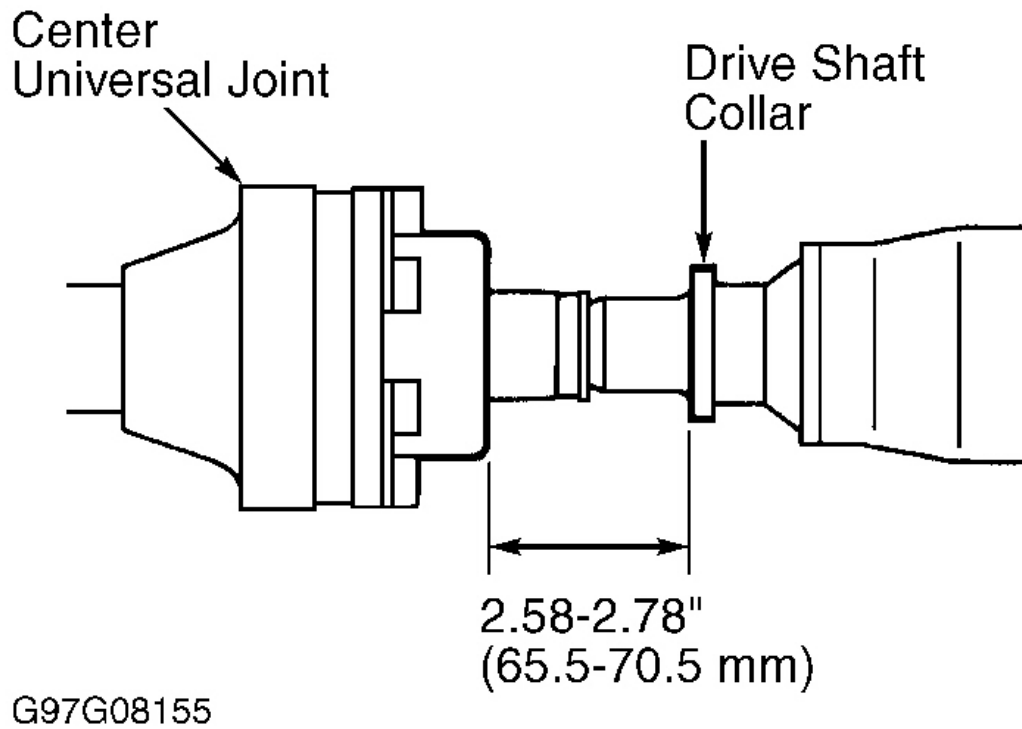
Adjusting Dimension Between Rear Side Of Center Universal Joint & Shaft Collar
